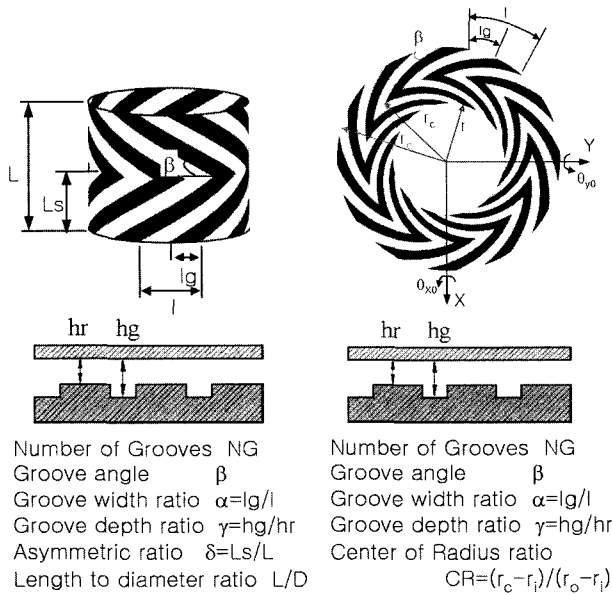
Geometric parameters of HGJB and thrust bearing.
